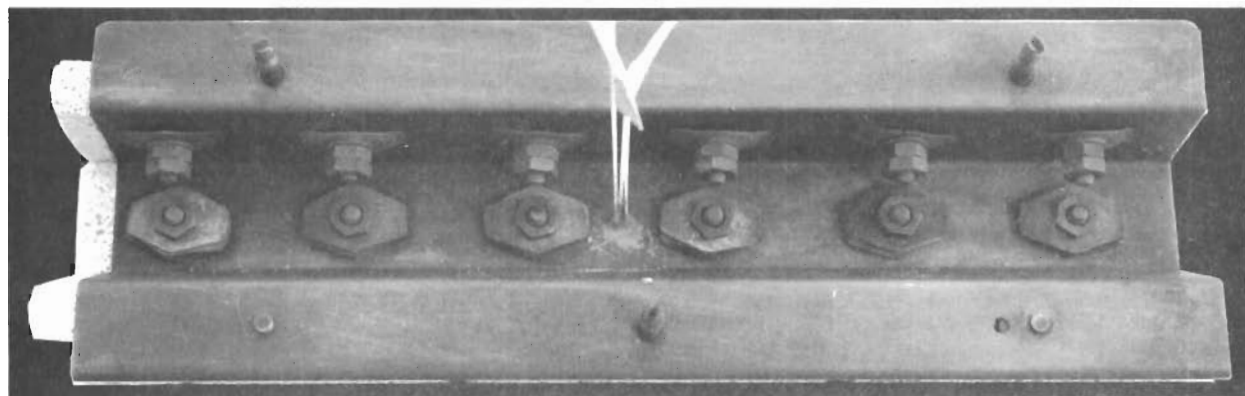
1.5-INCH RADIUS LEADING EDGE METAL STRUCTURE
